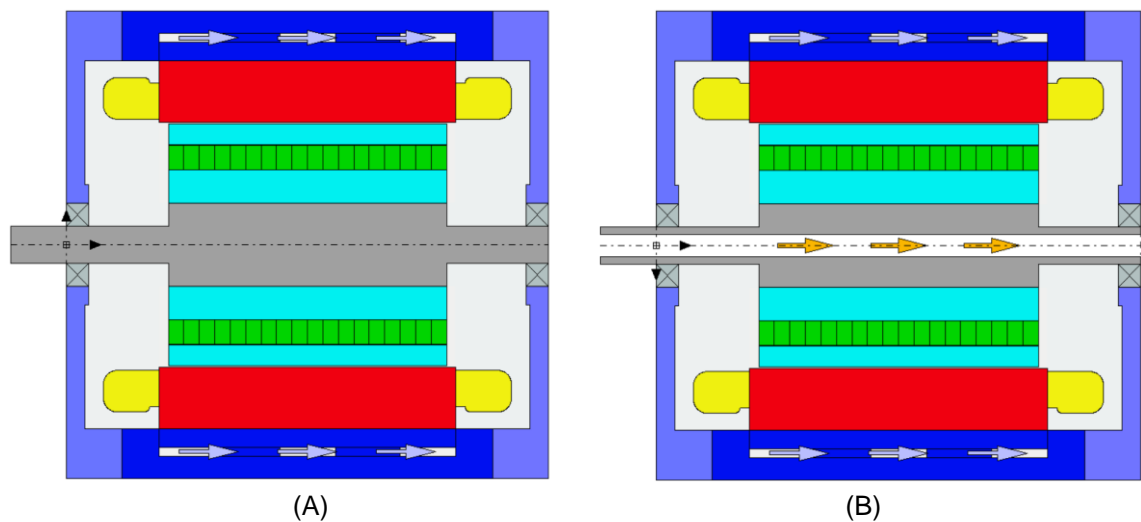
The original cooling system A (Water jacket cooling), the improved cooling system B (Water jacket + shaft cooling).
